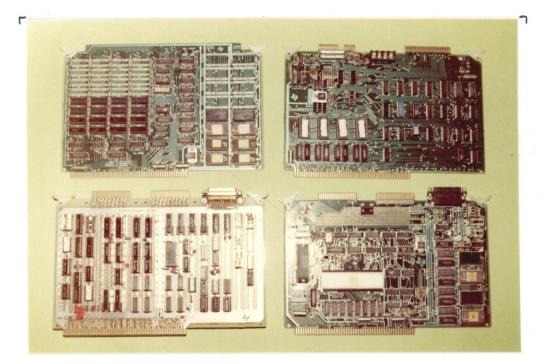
THE FOUR MICROPROCESSOR CONTROL SYSTEM BOARDS TOP LEFT :- TM990/201-41; TOP RIGHT :- TM990/302-1 BOTTOM LEFT :- PROTOTYPING BOARD; BOTTOM RIGHT :- TM990/100M-1
